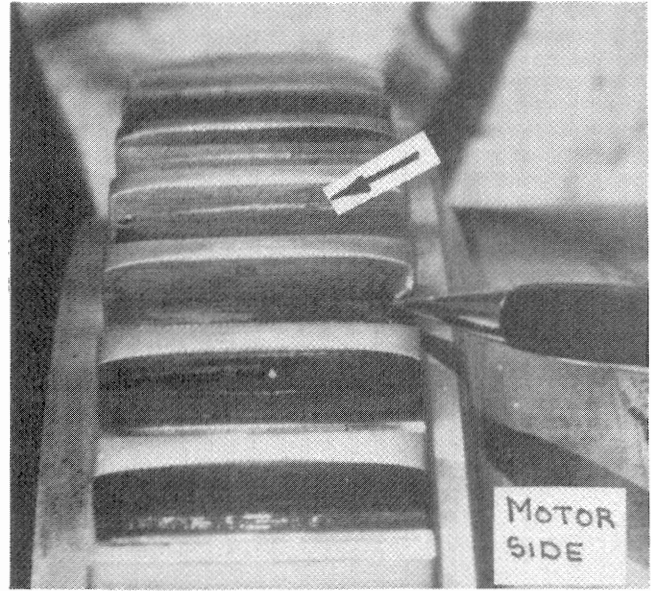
Motor Side Coupling Spool Piece Gear Teeth Showed Excessive Wear for Only Nine Months of Service.
